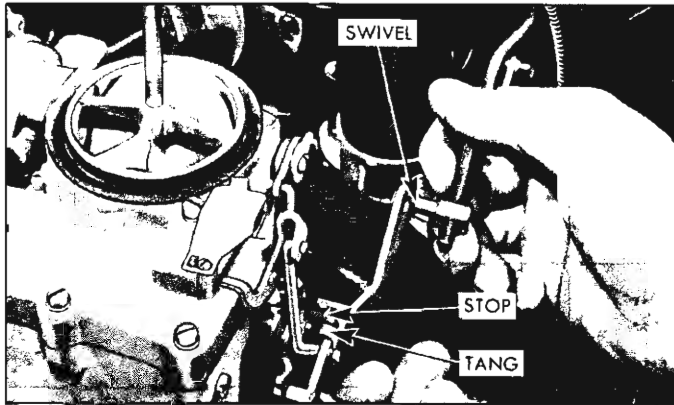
Adjusting Throttle Linkage—V-8 Two-Barrel
